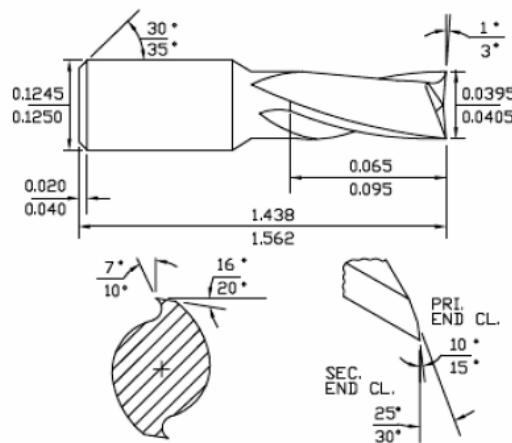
Micro tool #1640400 dimensions and geometry, and all dimensions are in inches (M.A. Ford 1998)
